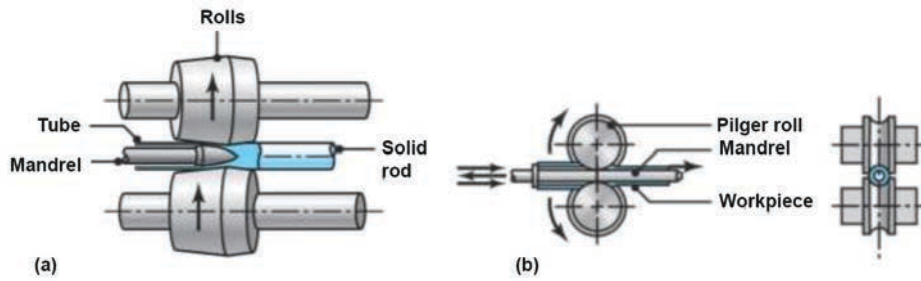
(a) Roll piercing setup of Mannesmann mill for producing seamless tubing, and (b) pilger rolling over a mandrel and a pair of shaped rolls. Source: Ref 4
